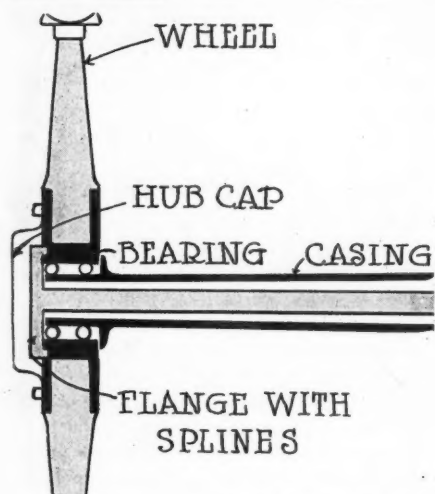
The above is an illustration of a floating rear axle. This type has the wheel bearing on the axle housing and the end of the axle shaft drives the wheel by means of splines
